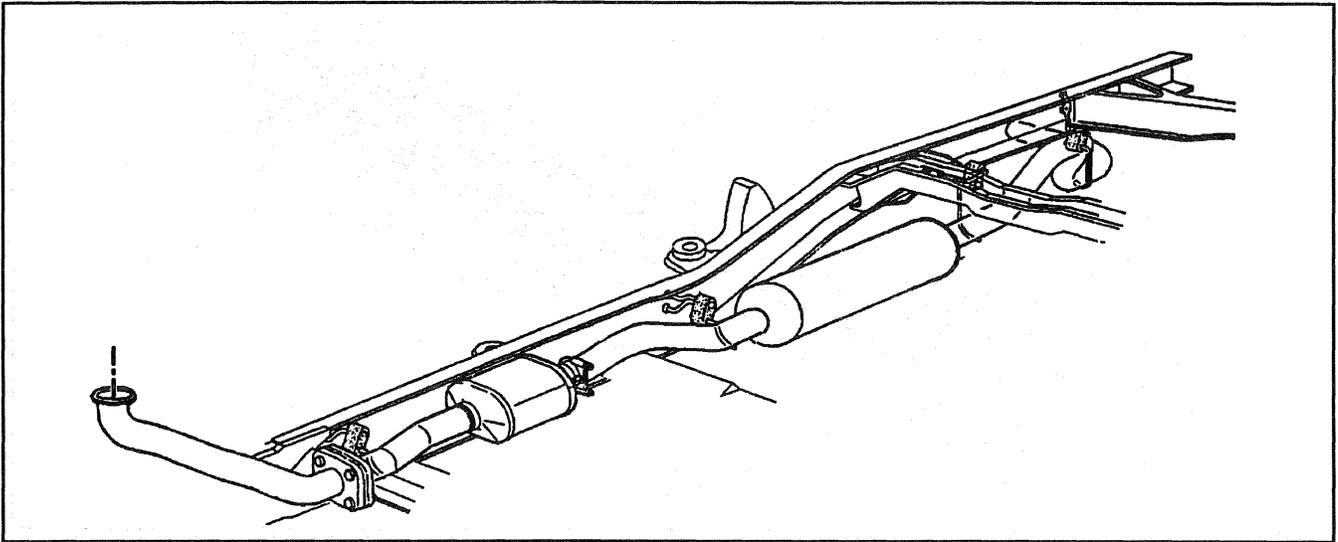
Exhaust System - C/K 1 and 2 Extended Cab Short Box w/6.5L Diesel Engine
